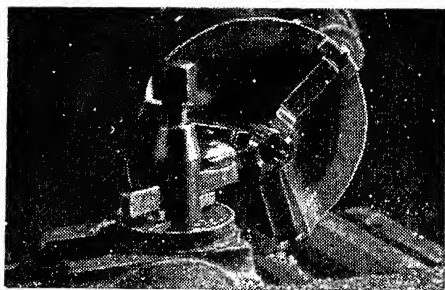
The parting tool shown has a specially sectioned blade ground throughout its entire length.
